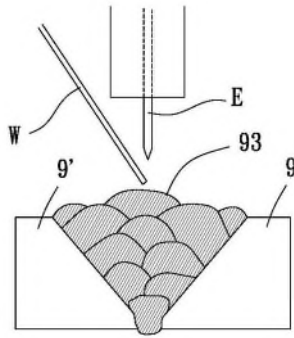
Depicts a cross-sectional view of two workpieces being joined by TIG welding procedure.
